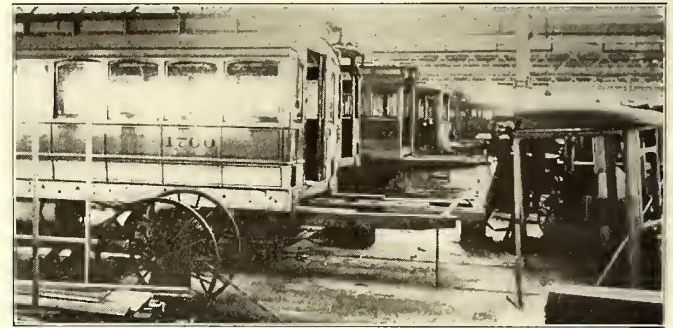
New Jersey Pay-As-You-Enter Cars—Rebuilding Platforms in the Plank Road Shops
